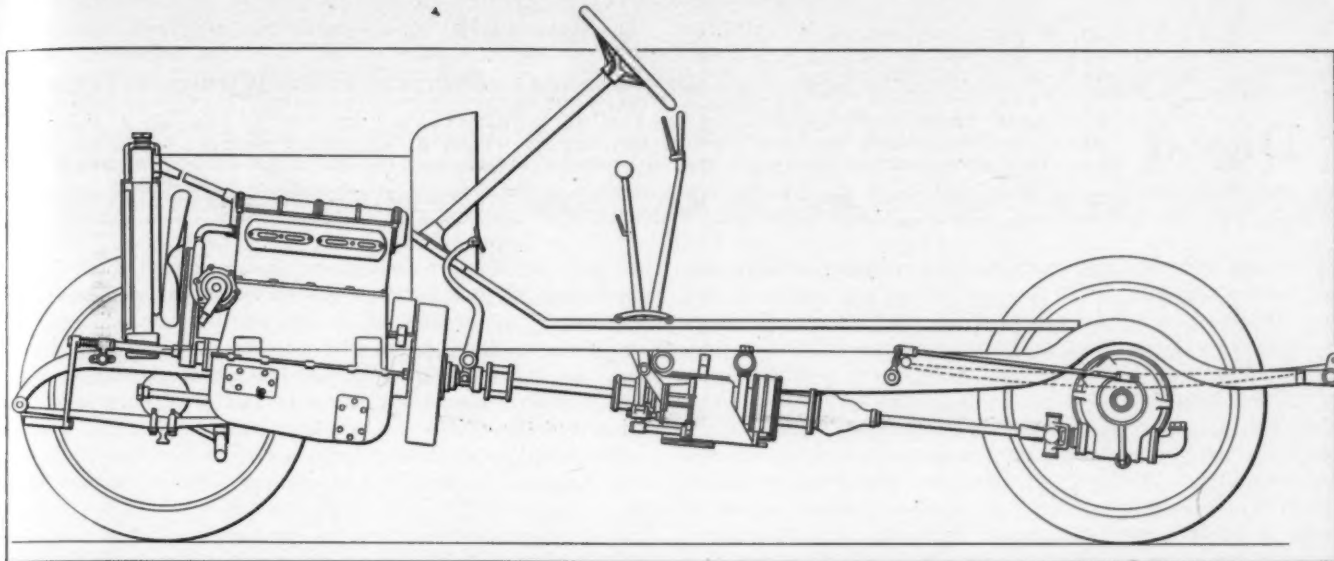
Side view of Knight Daimler chassis, showing straight line between engine, gear box and rear construction, worm drive and upswept frame
